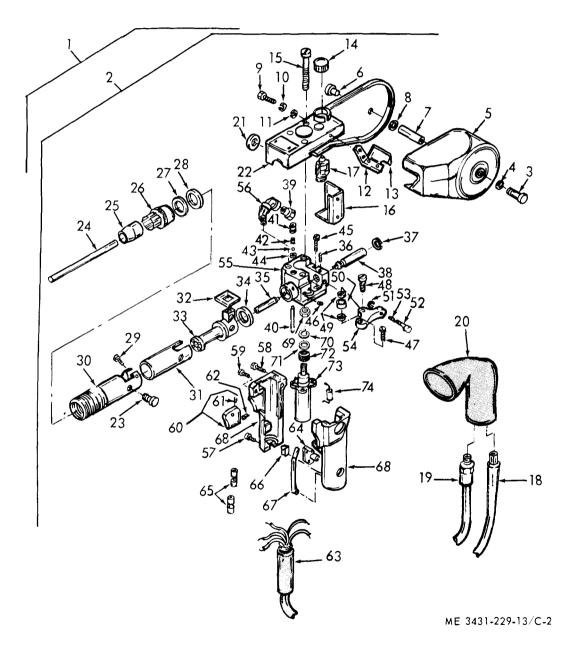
Welding gun, disassembly and reassembly.
